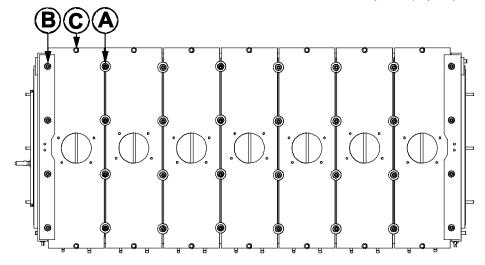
Removal of Burner Plate Hardware (Steps 9, 10, 11)
